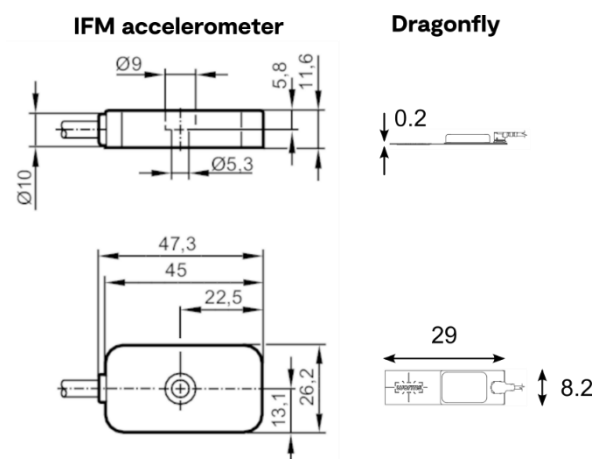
Schematics and dimensions in mm of the industrial accelerometer installed on the milling tool, and of the Dragonfly® sensor.
